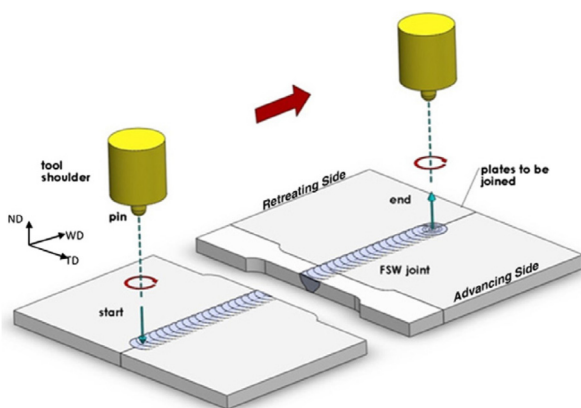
Schematic illustration of friction stir welding process [3].
